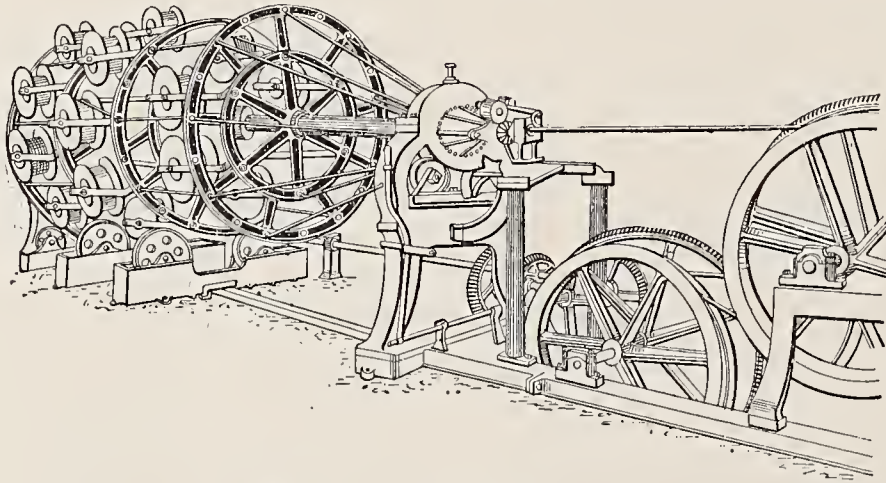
A MODERN SHEATHING MACHINE FOR LIGHT CABLES
